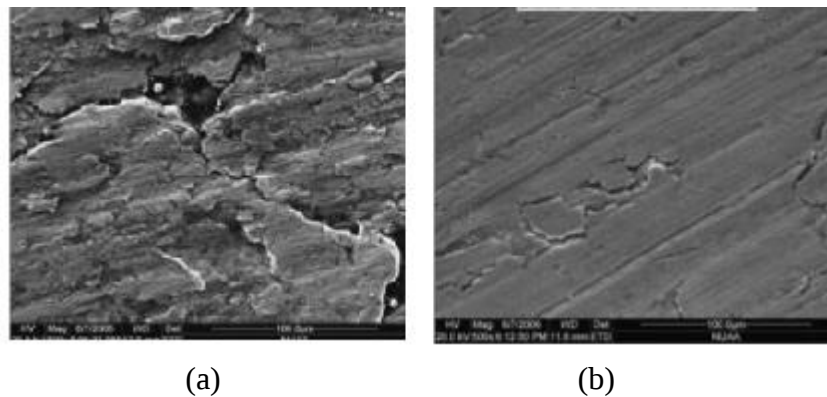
SEM image of formed surface: a) Without surface coating, b) With surface coating [78]
